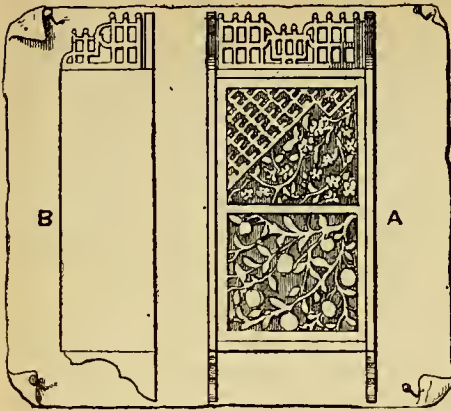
FRONT (A) AND SIDE (B) OF CUPBOARD.
